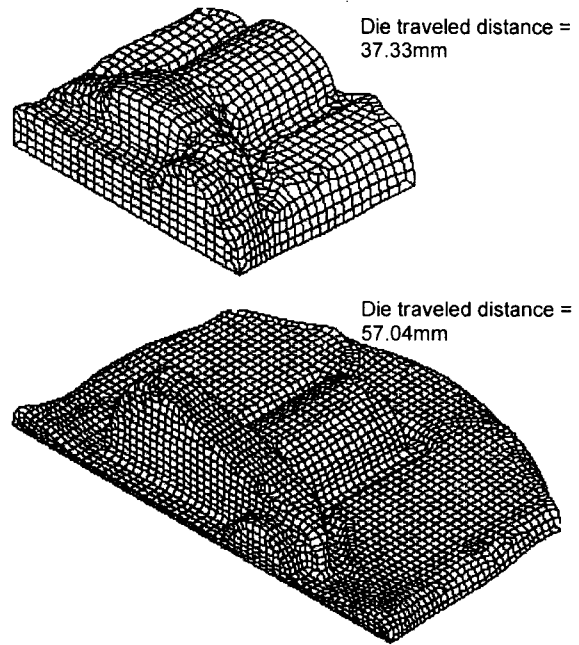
INTERMEDIATE SHAPES OF THE WORKPIECE IN FORGING OF A CRANK SHAFT (CONTINUED) (AFTER MESH GENERATION).
